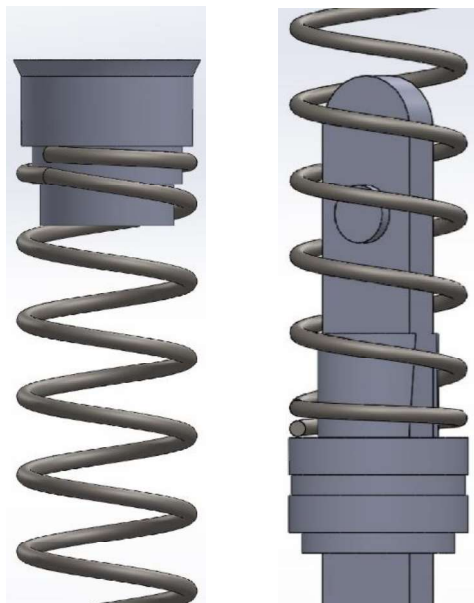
Spring assembly views at relevant mates: spring to plunger (left) and spring to keeper (right)
